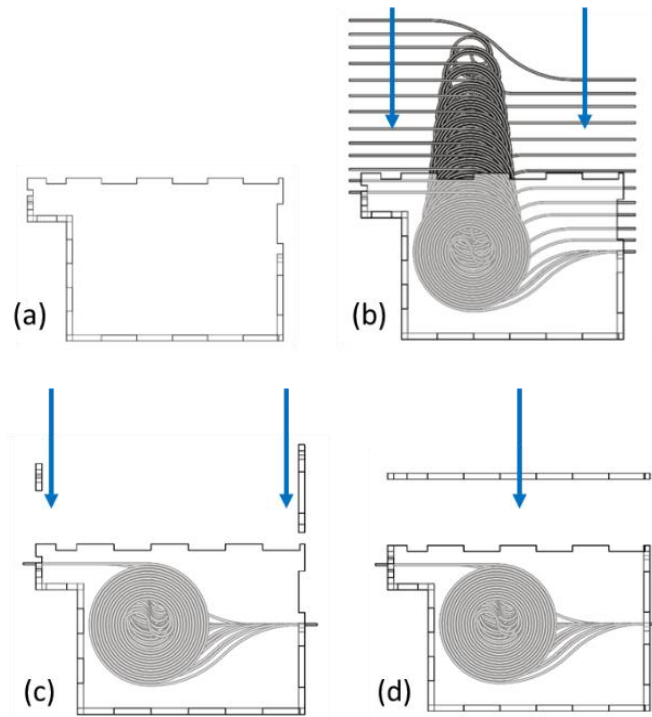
Assembly process of the PADL array. (a) Assembling two sidewalls, bottom, front, back, and spacers. (b) Arranging and placing 16 PADLs. (c) Fastening PADLs (d) Affixing top panel [84]. Reprinted with permission © 2016 by JOPT.
